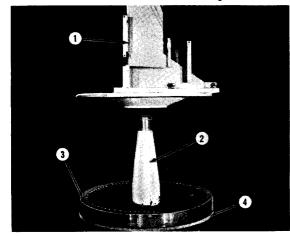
REMOVING HOUSING 1. Housing 2. Kingpin 3. Steering Gear 4. Flange
